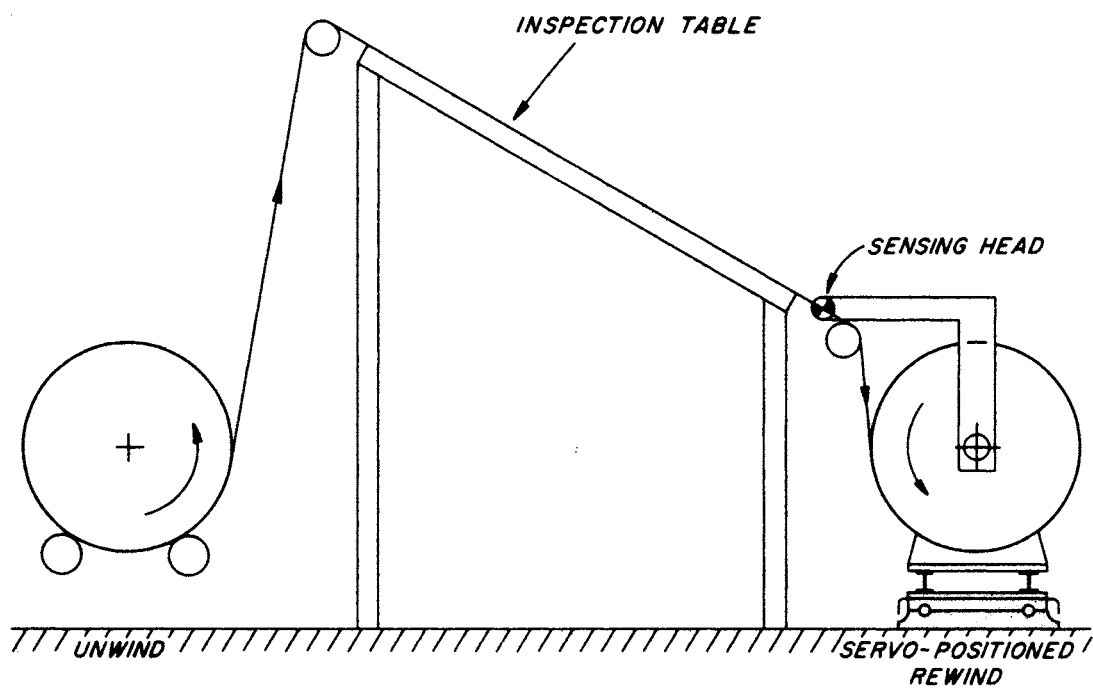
Shifting Stand for Rewind Guiding for Textile Inspection Machine.
